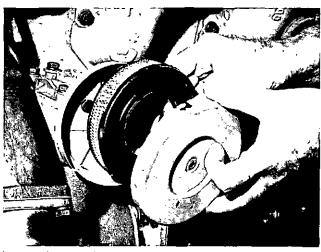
(V414209) Cummins air compressor breather — paper element
